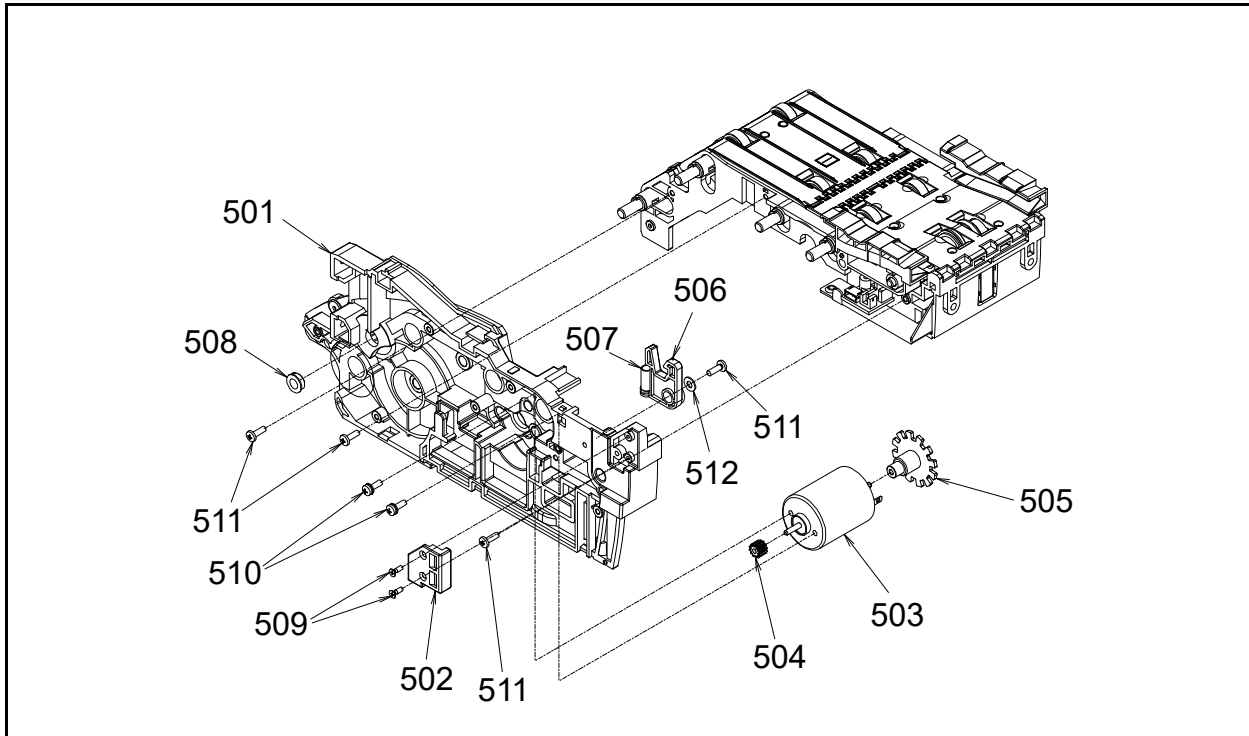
UBA Pro Transport Unit Exploded View 4
